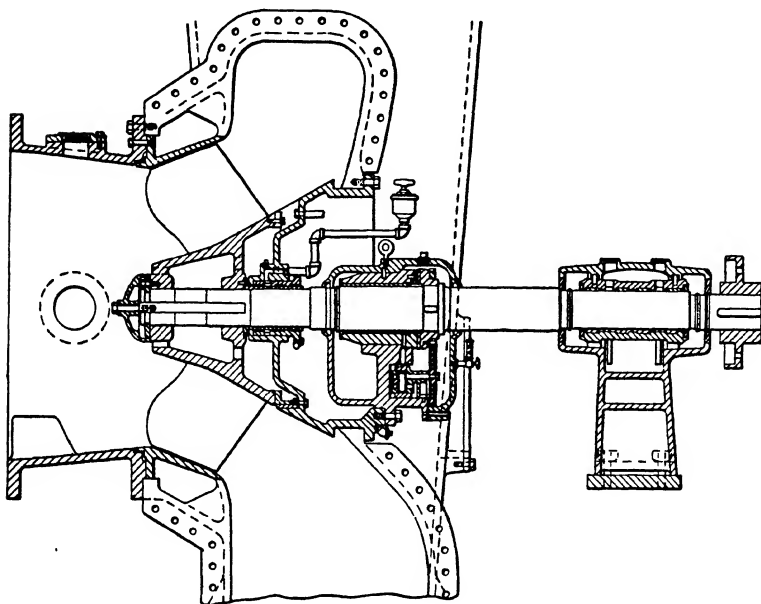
Cross-section showing general construction of Worthington screw pump for drainage and irrigation work.
